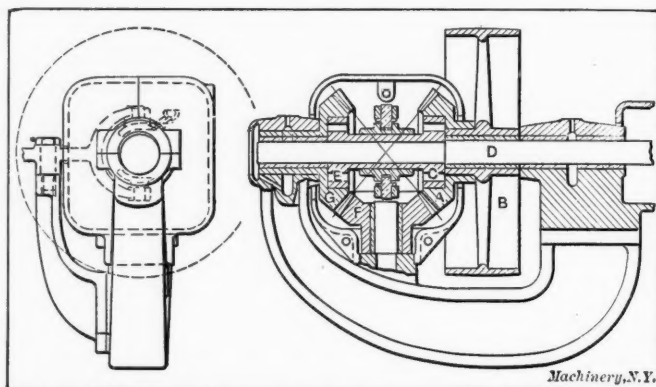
Arrangement of Gearing and Clutches for Reversing
